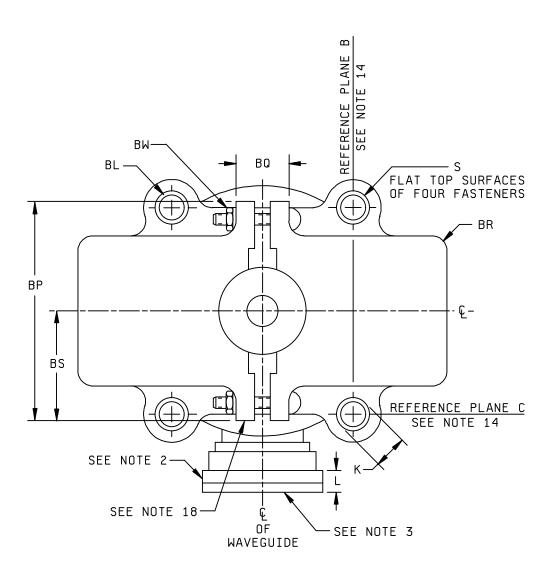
Outline drawing of electron tube type DOD-042 (top view).
